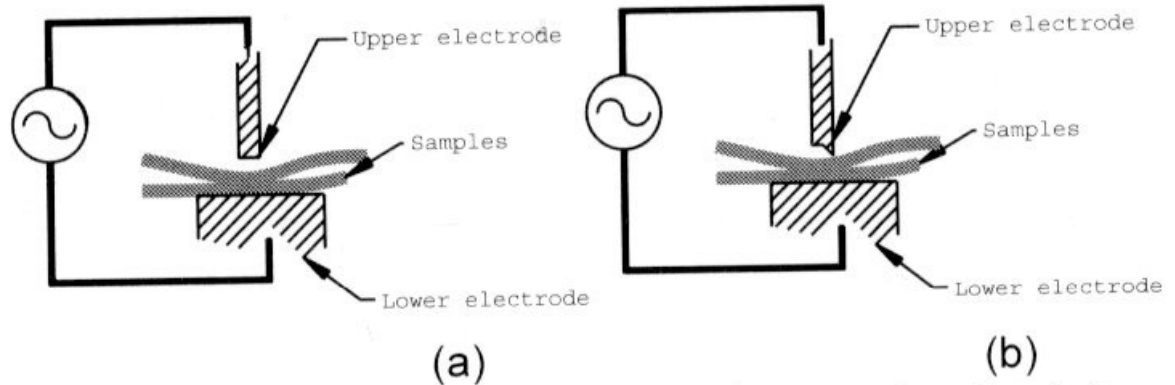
Typical electrode configuration for (a) welding and (b) cutting and sealing
